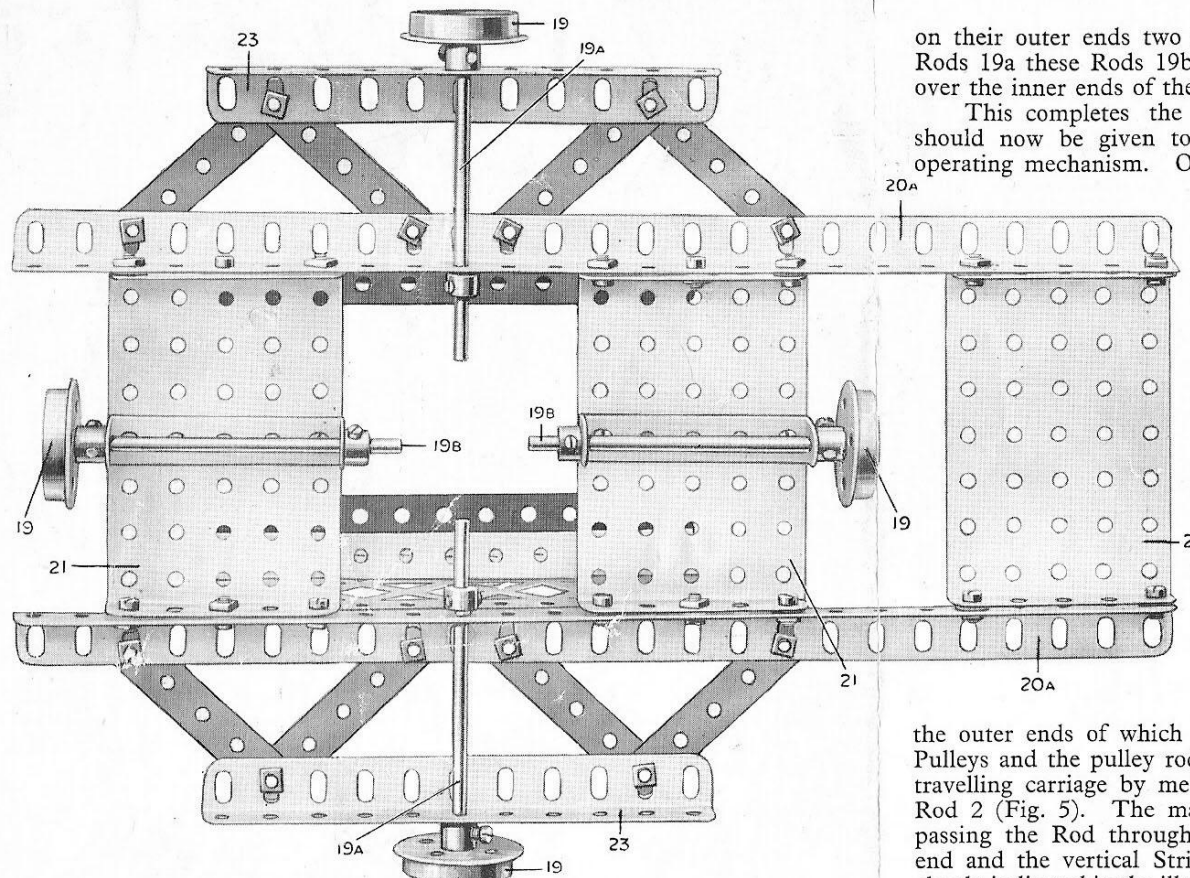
Underneath view of base of model, showing method of mounting the wheel axles.
